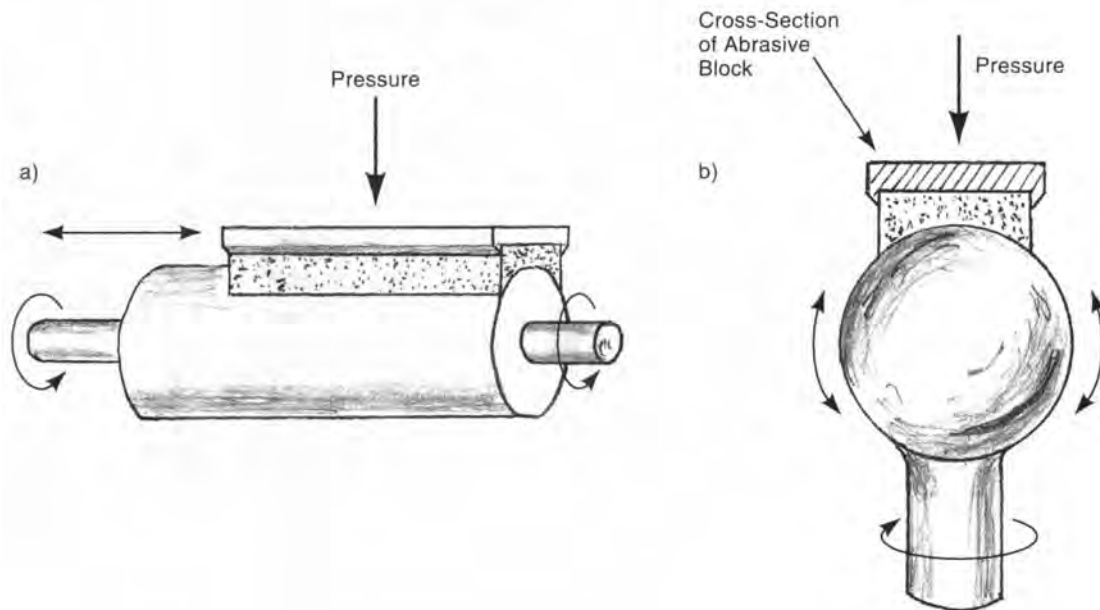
J3 Superfinishing. a) a cylindrical surface. The workpiece revolves while the abrasive block is moved back and forth along the axis. b) a spherical surface. The abrasive block moves around the spherical workpiece as it rotates. In all applications, the abrasive conforms to the shape of the workpiece.
